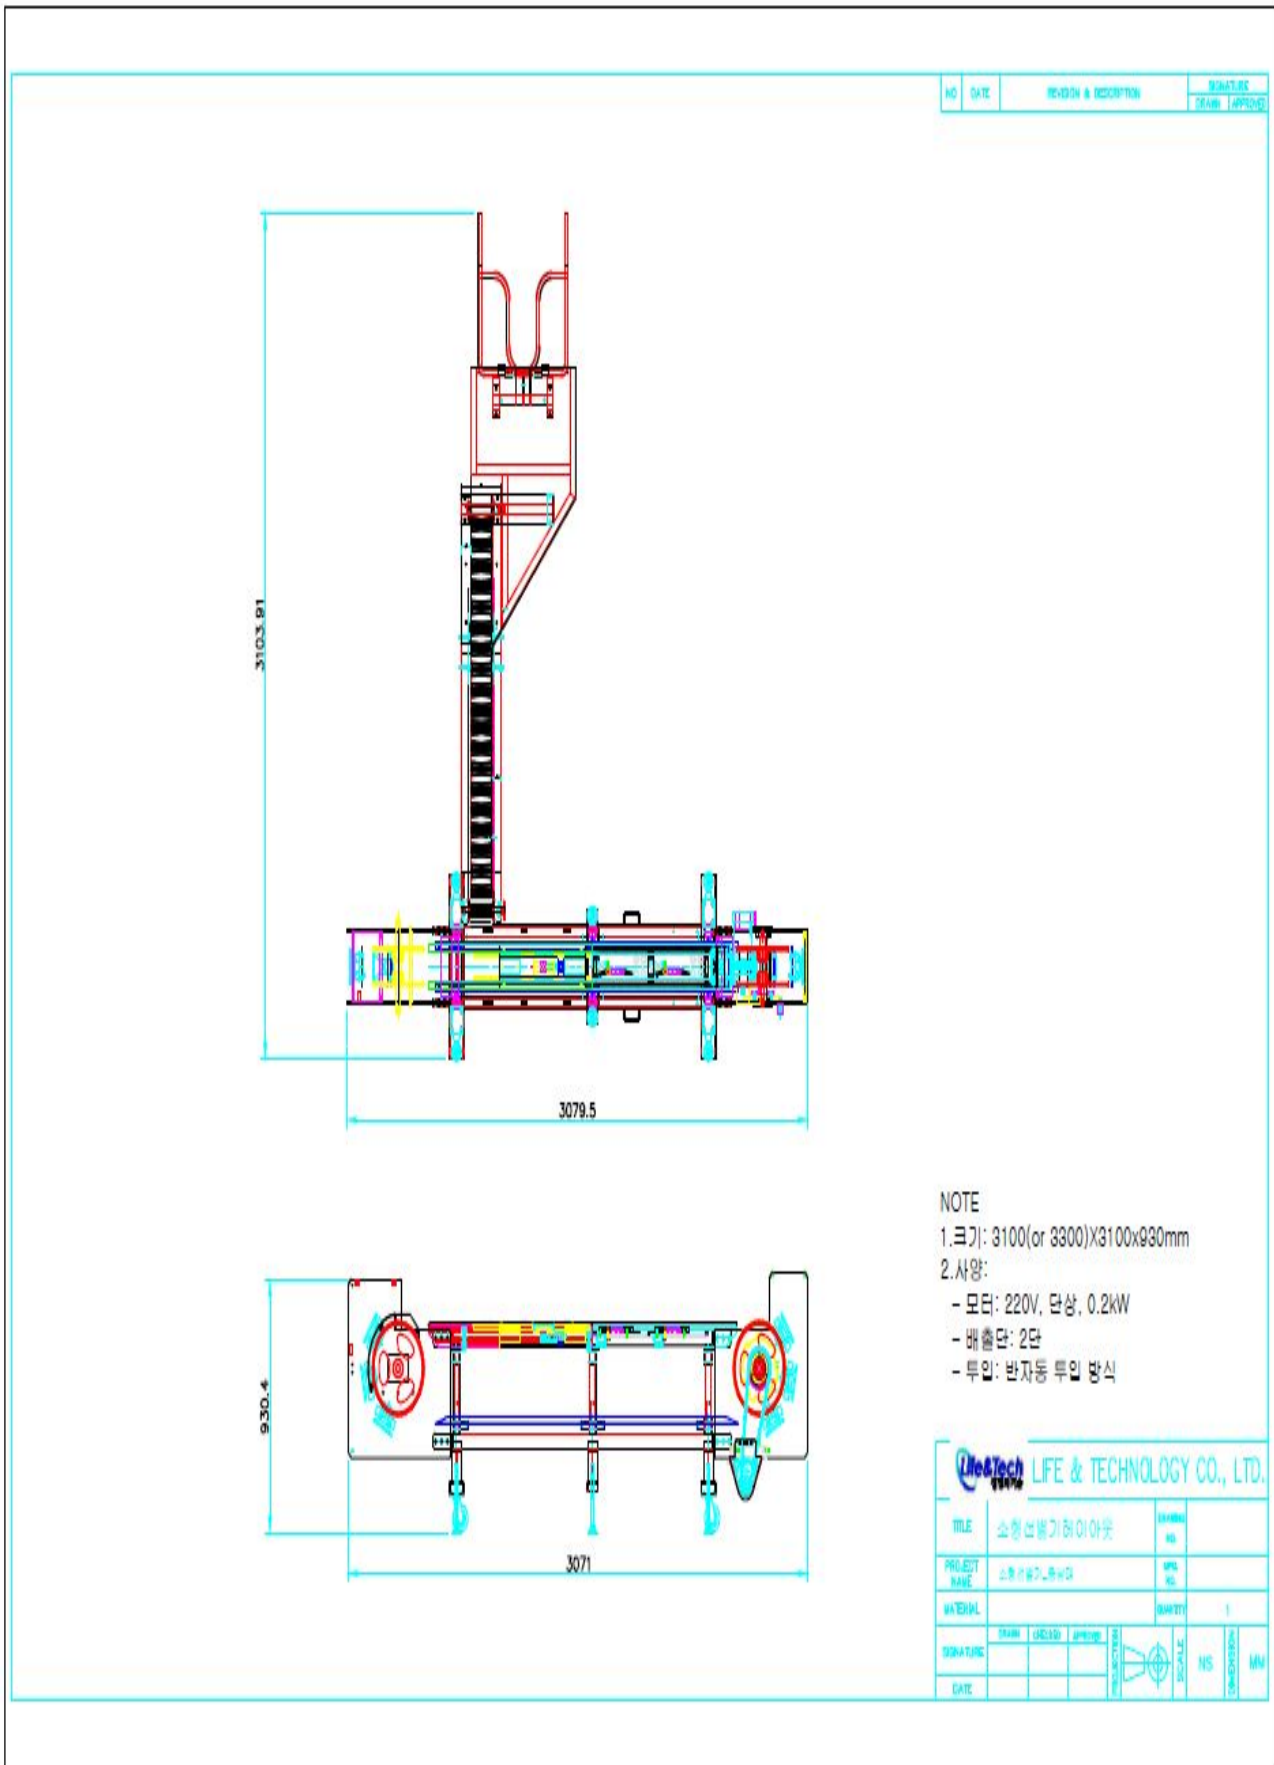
Drawing of designed sorting machine for seed potatoes.
